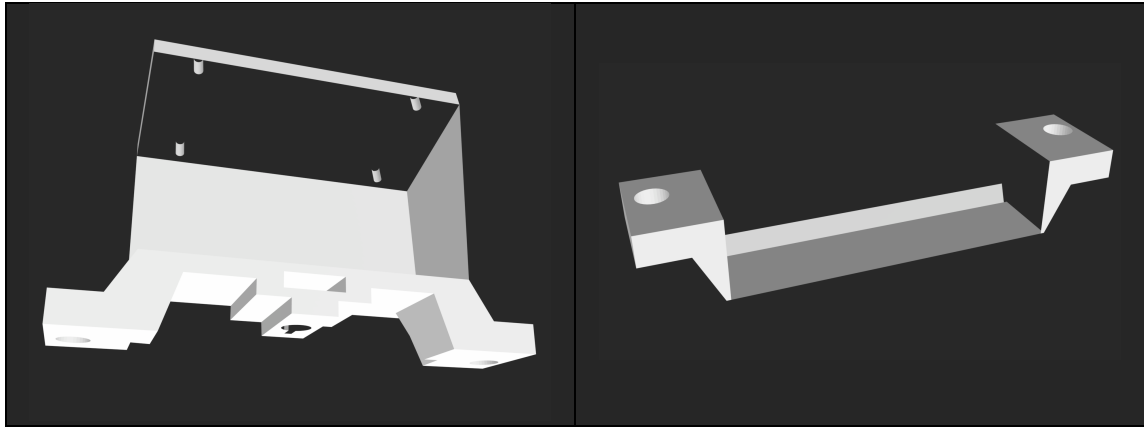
(a) The Layout of the upper part of the frame (b) Lower part of frame
